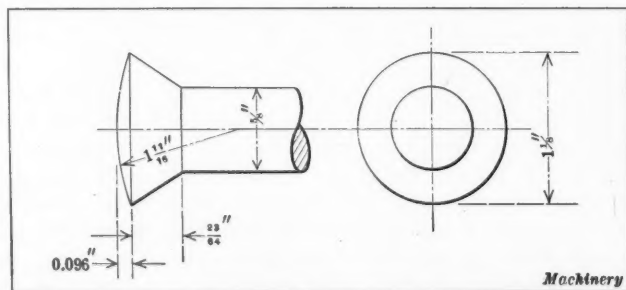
Screw-head used as Example to illustrate Method of calculating Forming and Cutting-off Tools
